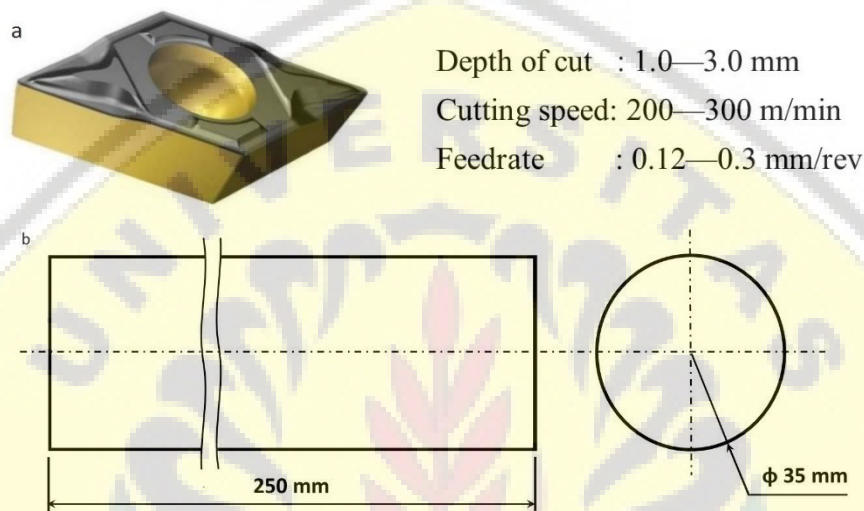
The TiAlN coated carbide tool used in the experiments and its operating range. Also, The workpiece dimension
